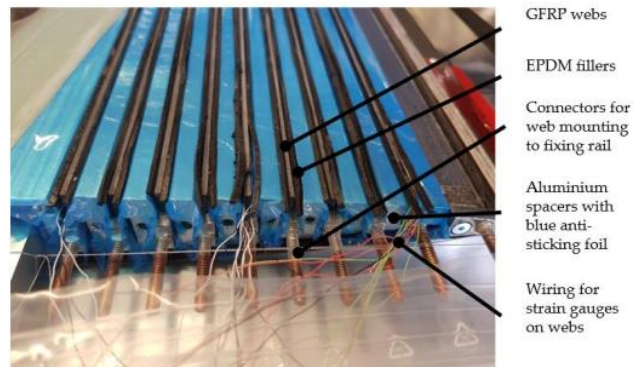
Assembly of technology demonstrator before applying EPDM skin (blade root)
